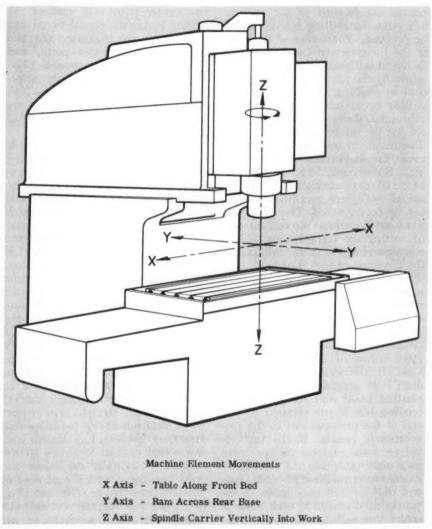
Diagrammatic sketch of a continuous path machine, showing the axis elements. By combining the movements of the several
